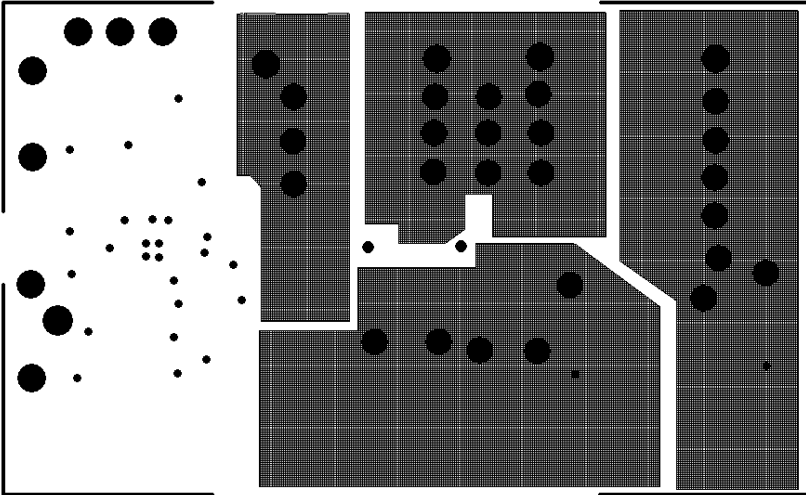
SP6133EB PCB Layout Inner Layer 1 & Inner Layer 2
